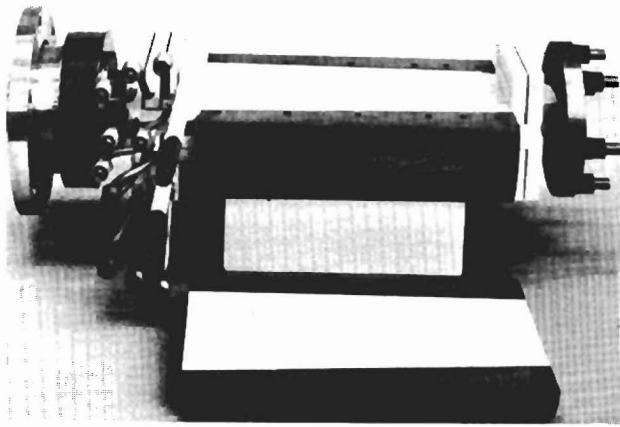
Magnet partial assembly, TR-BM-01, 02
